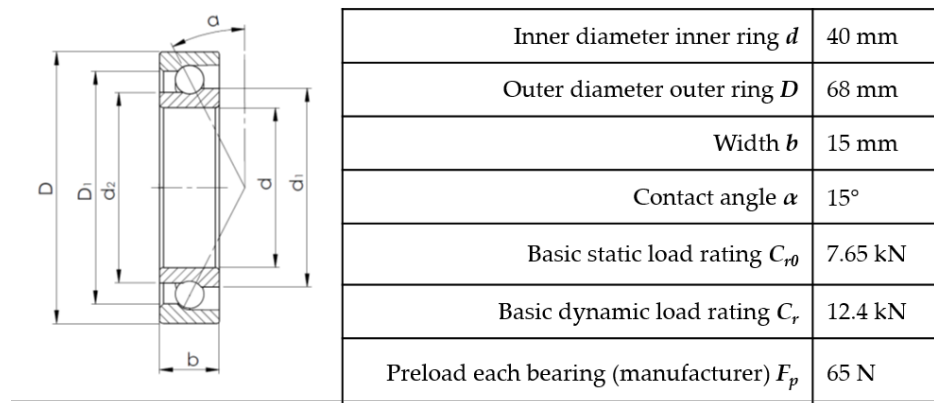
Test bearing data of spindle bearing type SKF 7008/HCP4AH1DGA [24].
